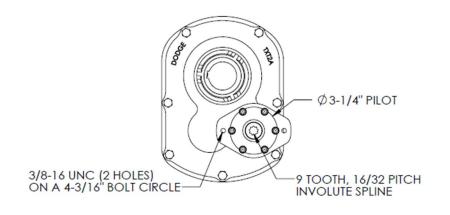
SAE "A" Mounting Flange-2 Bolt (3/8" bolts) with 9 tooth spline
